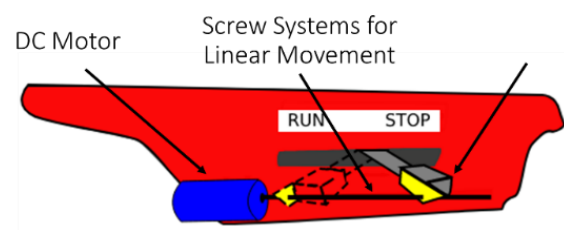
Throttle lever mechanical modification design for G3000 tractor
